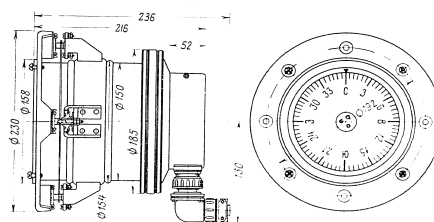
Overall and Installation Dimensions of Directional Type Transmitter.
